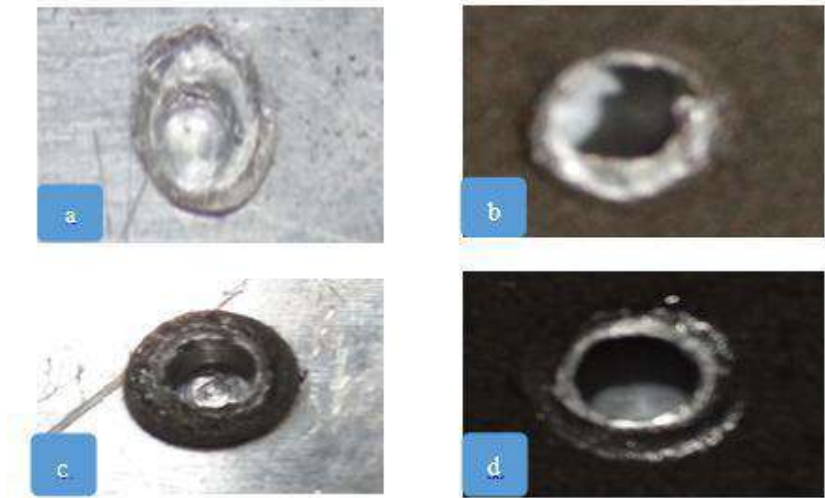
Lap shear tensile specimens interfacial mod fracture type of AA5754/Ni/AA1050 Aluminum alloy sheets. a, b 3.4mm plunge depth and c,d 3.8mm plunge depths
